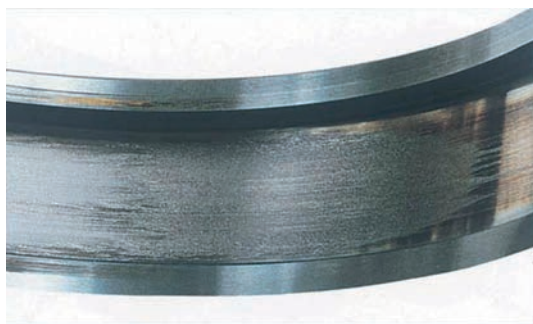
Smearing on the outer ring raceway of a cylindrical roller bearing
